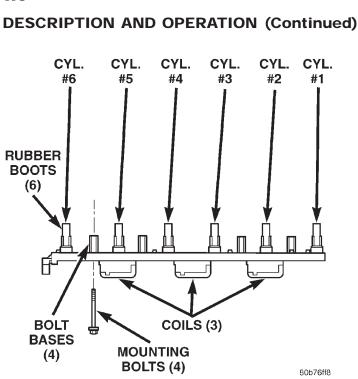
Ignition Coil Assembly—4.0L 6–Cylinder Engine
